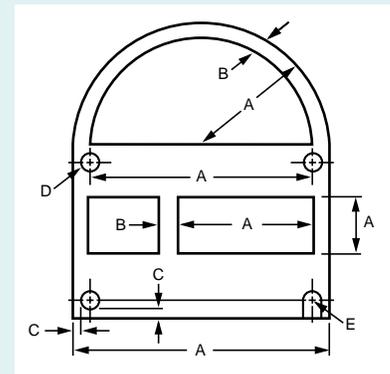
PORCUPINE METALASTIC Die-Cut Gaskets (fully dimensioned drawings required)
